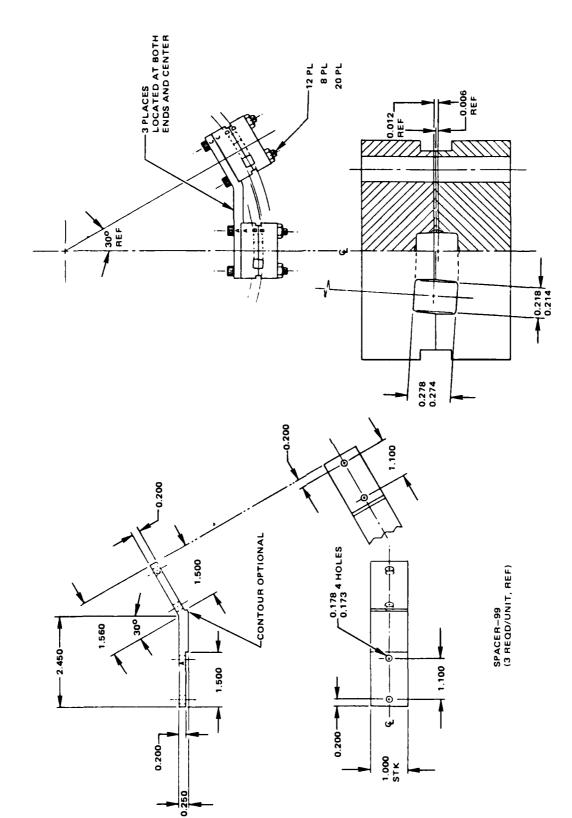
Skewed mold Dwg. No. 3707794 (Sheet 1 of 3).
